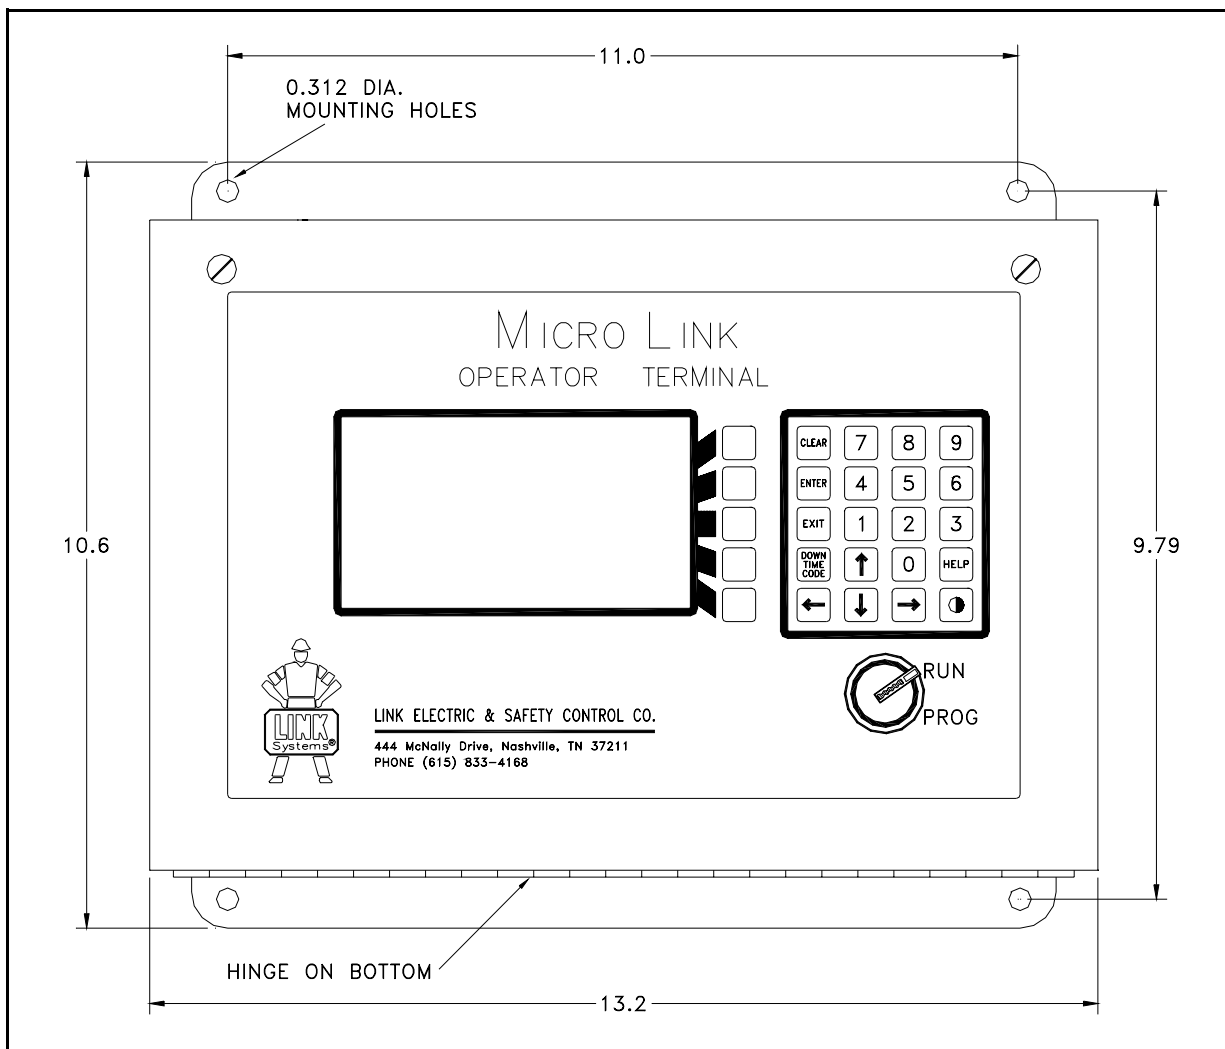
Dimensional Drawing of Remote Mount Enclosure (Hinge on Lower Edge)
